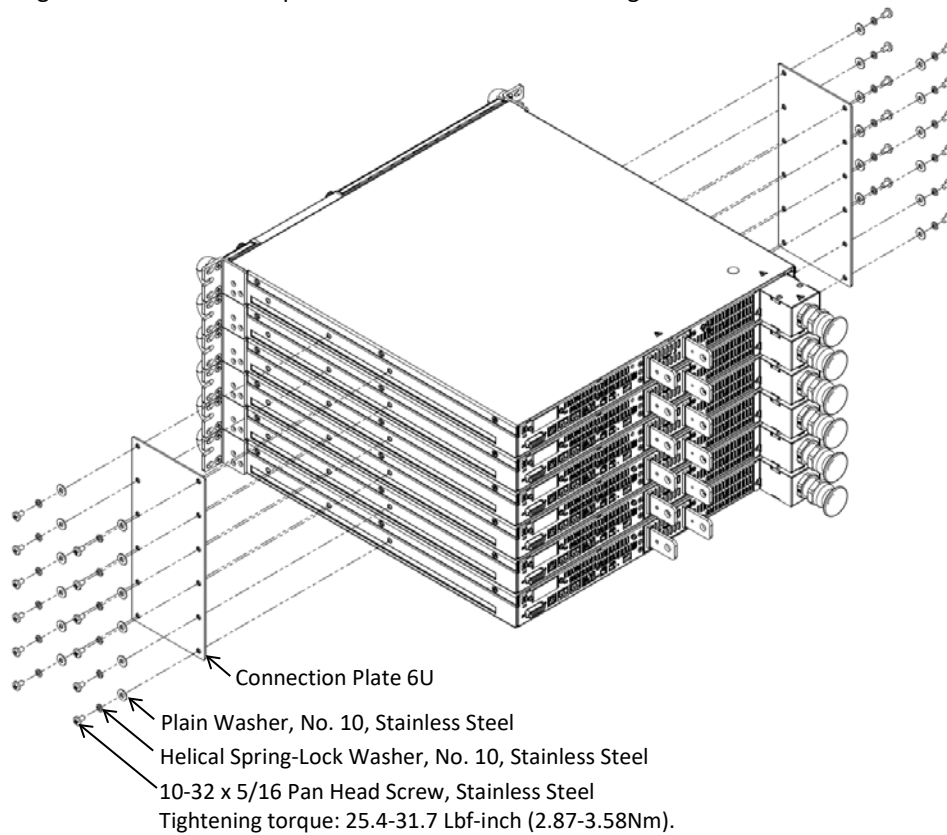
Six 60V±100V Units Connection Plates 6U Assembly
